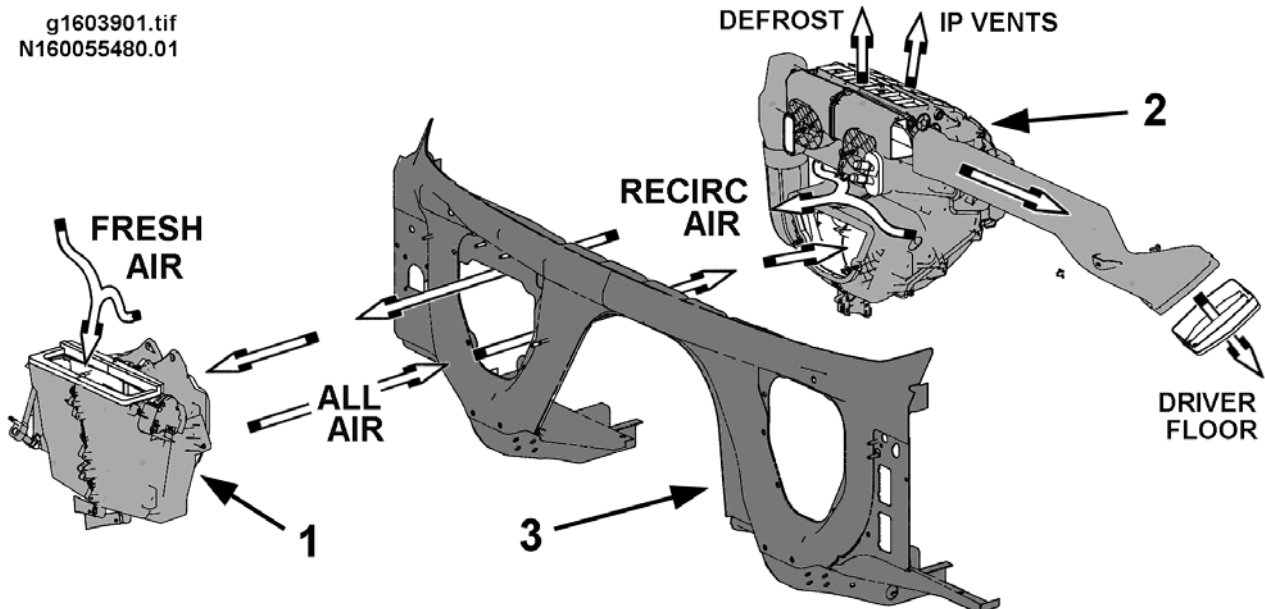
Heater Housing and Evaporator Housing Locations – Front HVAC System
